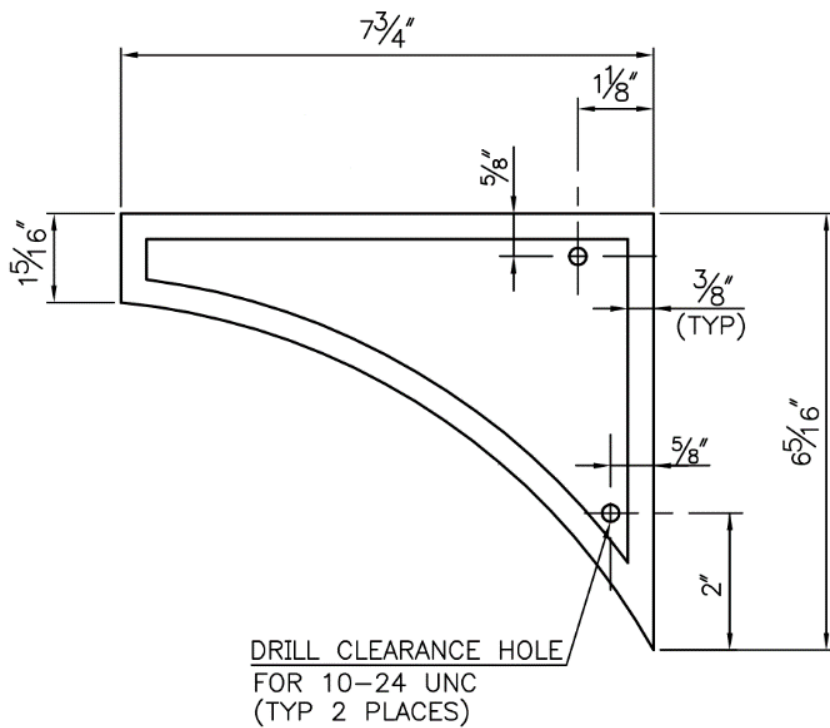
Bracket Arm Access, Dimensions, Nominal
